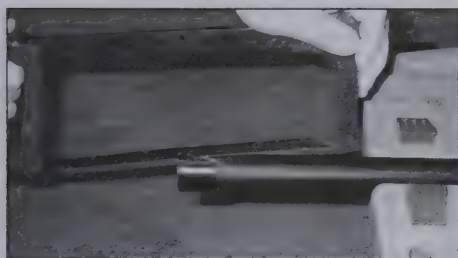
Cut a slot in the end cap assembly to facilitate its removal.
